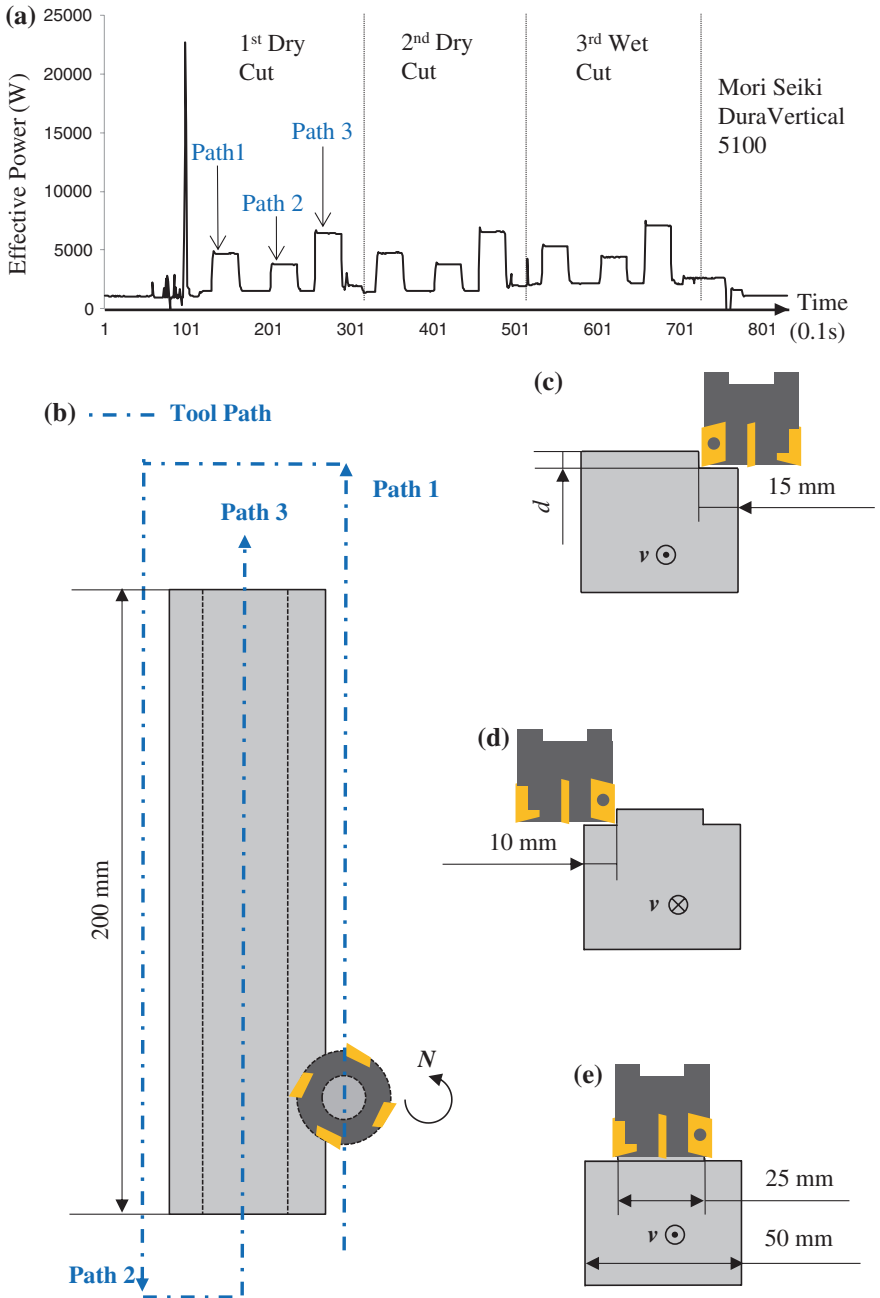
Exemplary power curve of one milling experiment and illustrations of cutting steps (cutter diameter 32 mm). a Exemplary power curve of one complete experiment run (32 mm). b Schematic illustration tool path. c Tool path 1. d Tool path 2. e Tool path 3
